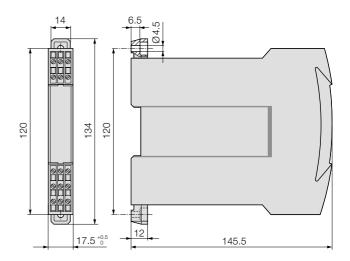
SINEAX TV 808 in housing  ${\bf S17}$ , screw hole mounting brackets pulled out.
